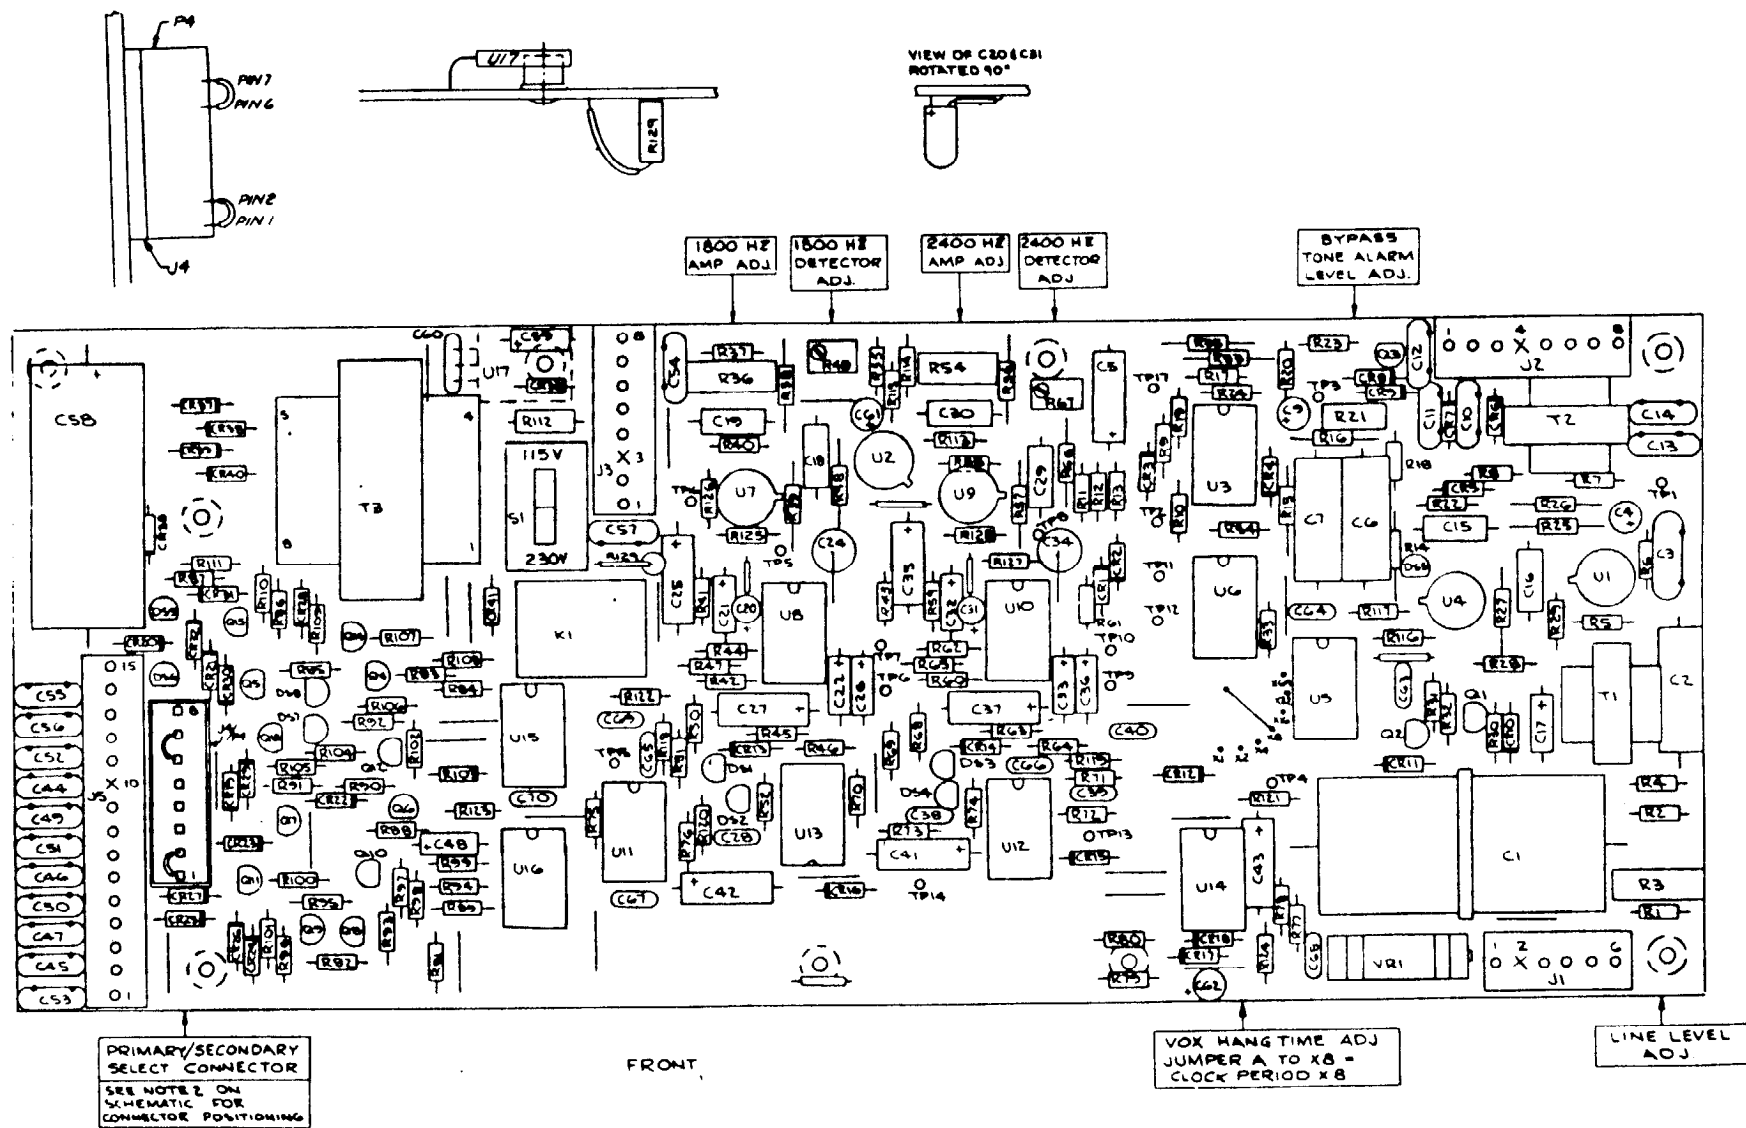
Remote Control PC Board Assembly A1, Component Locations
